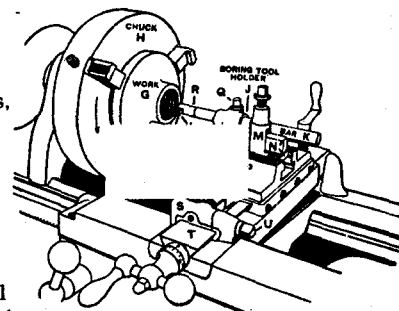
INSIDE THREADING IN ENGINE LATHE.
